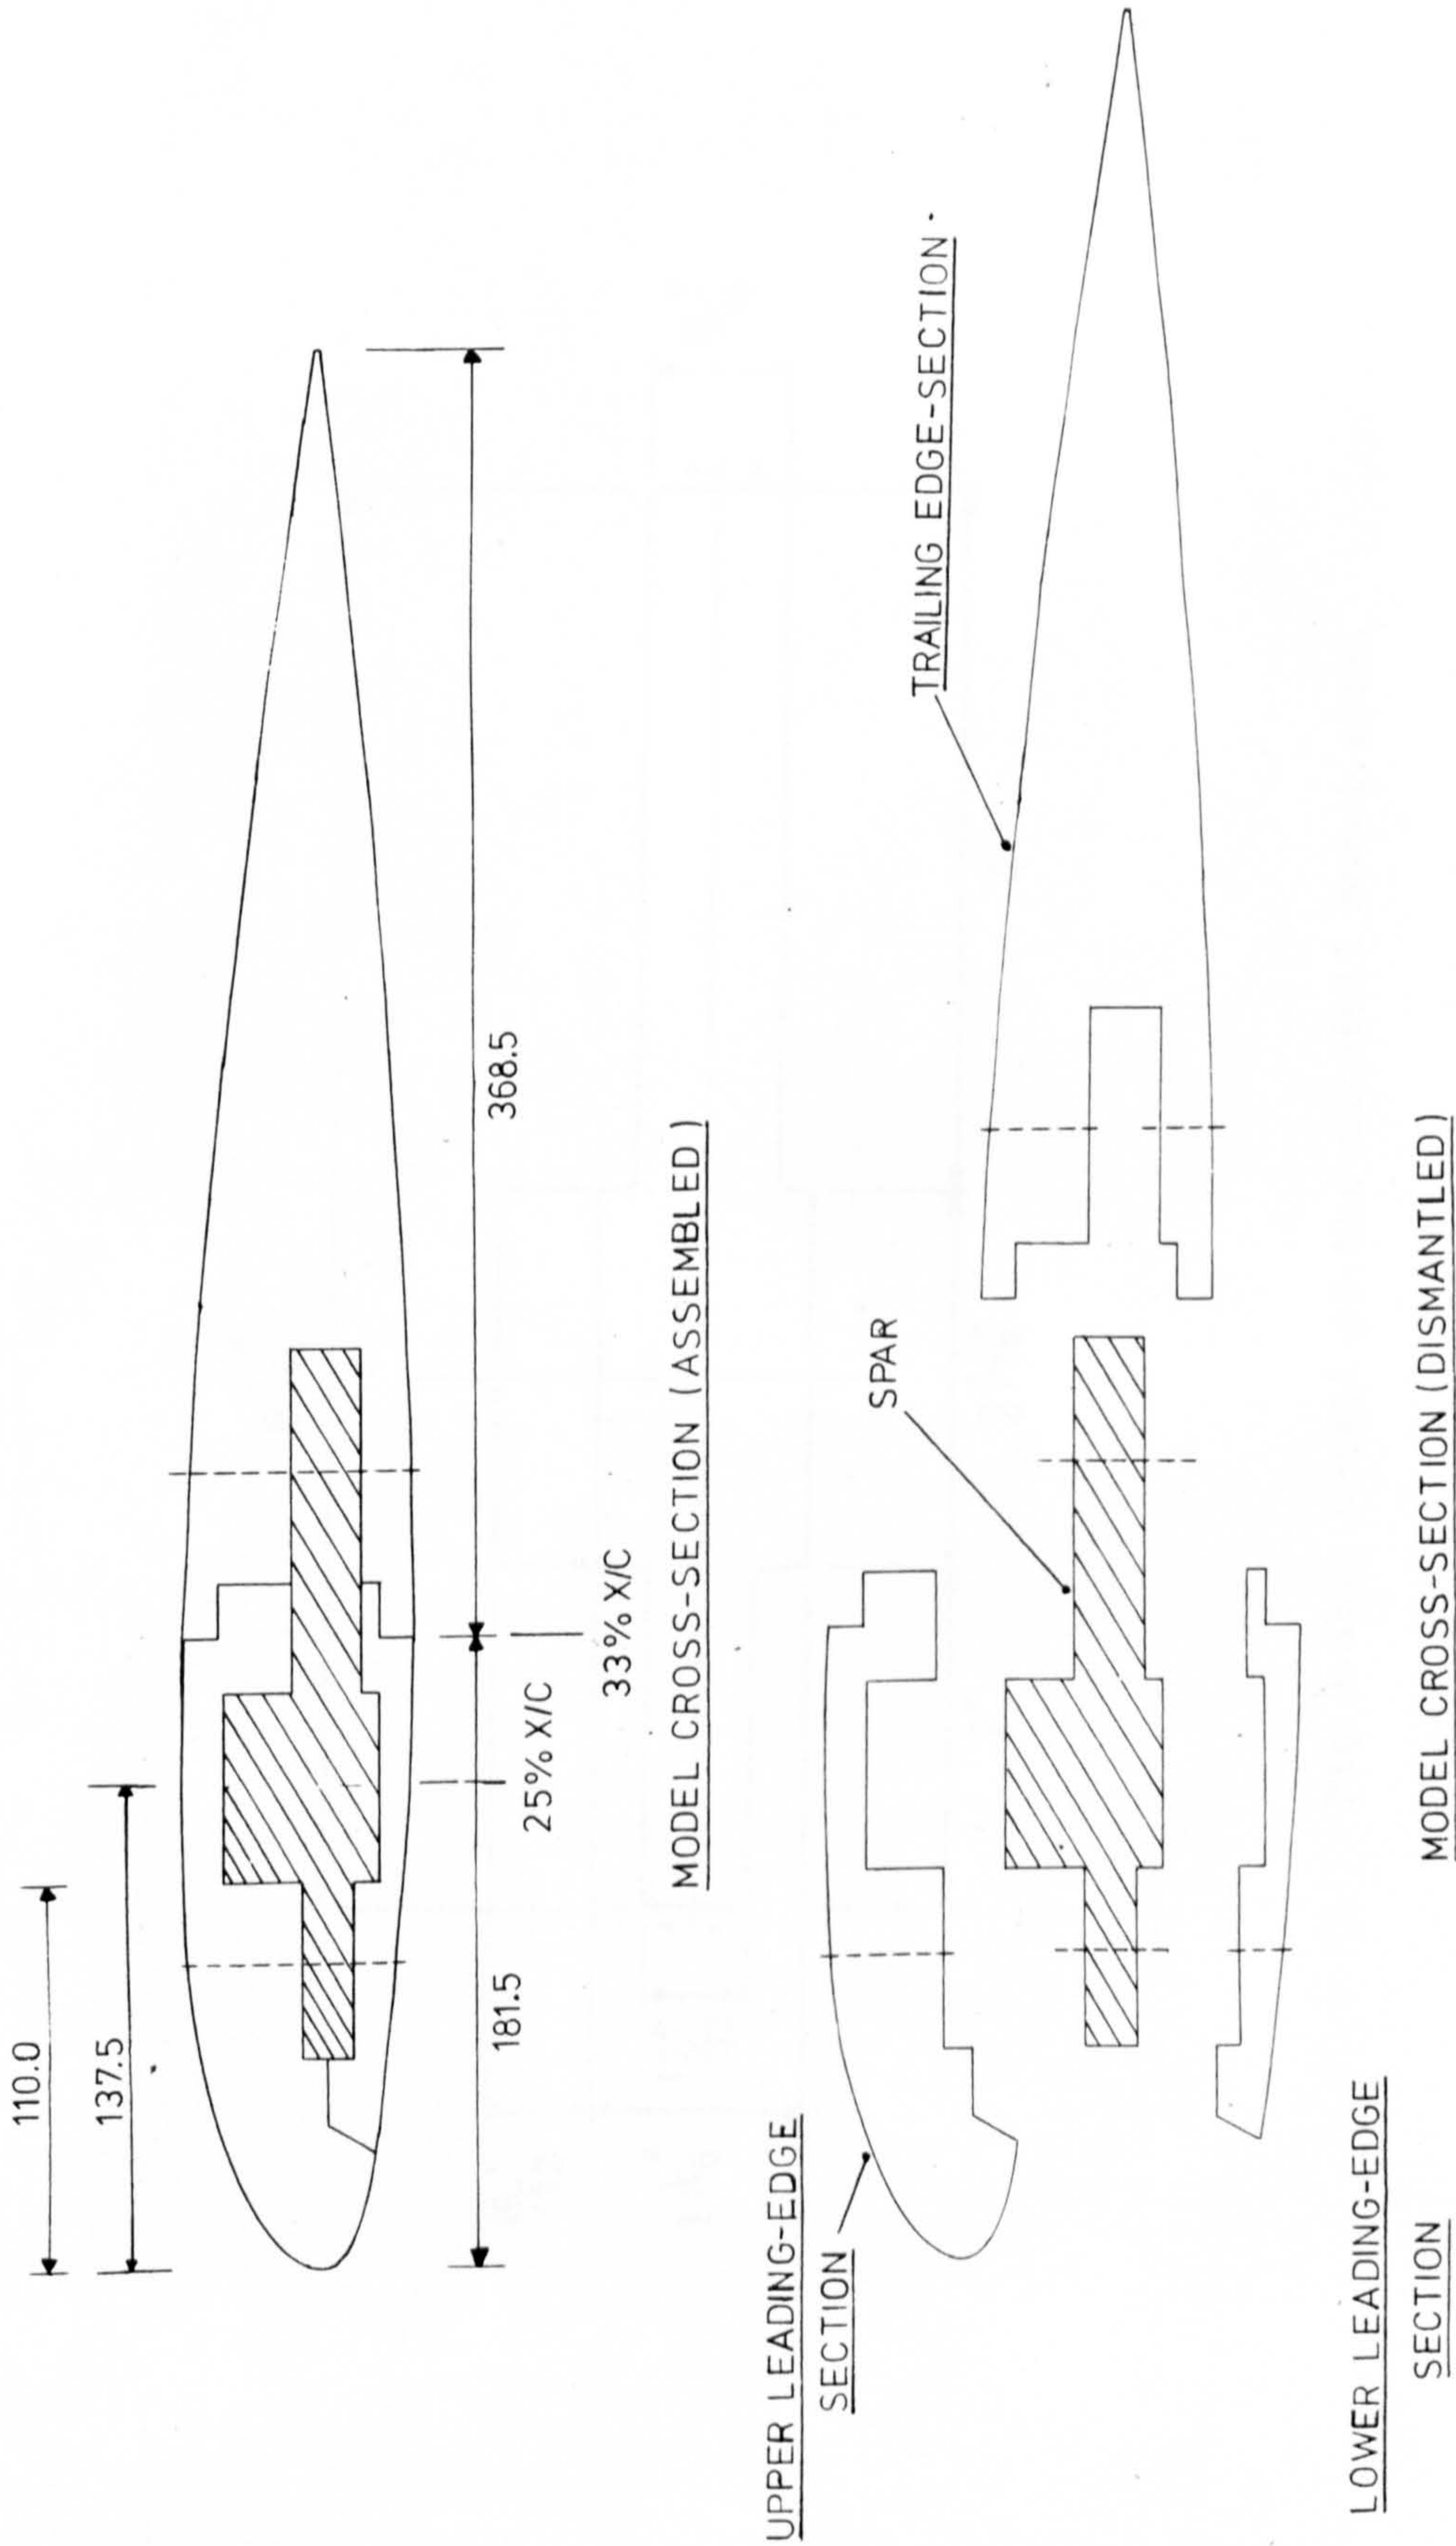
Detail of the aerofoil model cross-sectional assembly.
